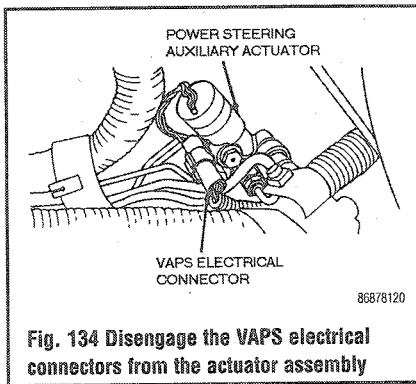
Disengage the VAPS electrical connectors from the actuator assembly
